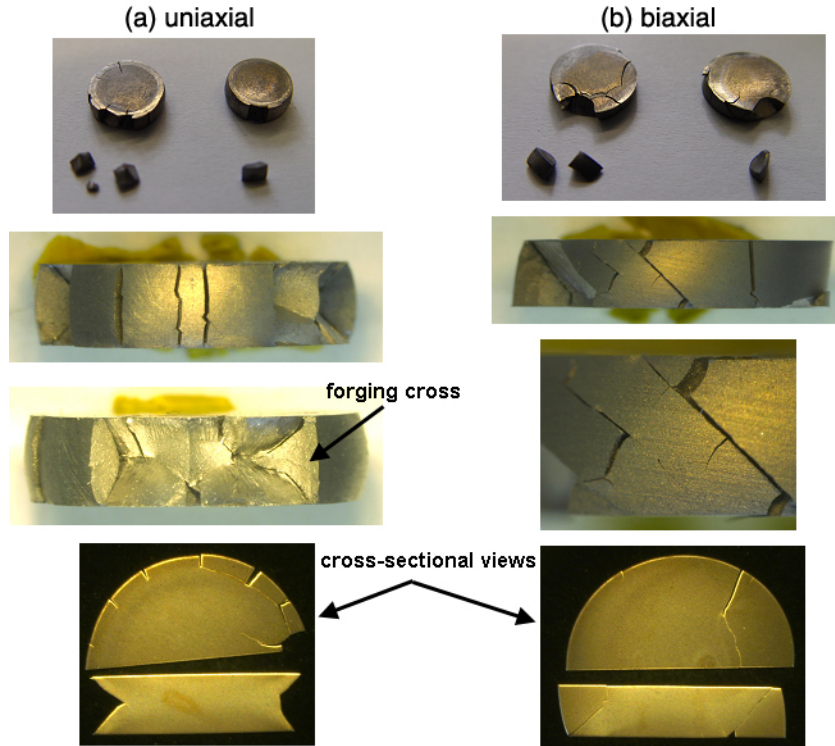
(a) Uniaxial and (b) biaxial specimens recovered after compressive testing on the Instron at $\sim 1 \text{ s}^{-1}$. Uniaxial specimens show forging cross features from 45° shear fracture and vertical cracks around the periphery of the specimen resulting from tensile stress. Biaxial specimens show parallel shear cracks originating from the 96° corners of the specimens.
